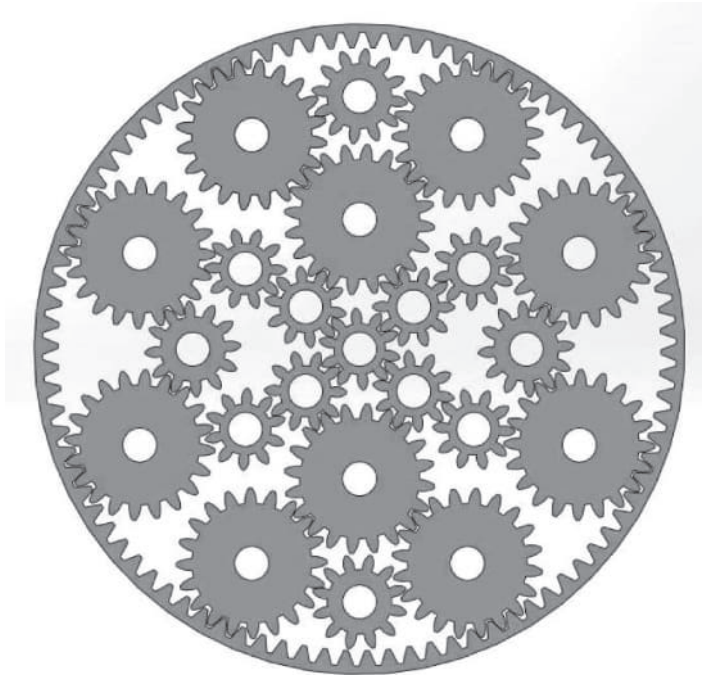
A huge size planetary gear set for electric-wind-power transmission.
